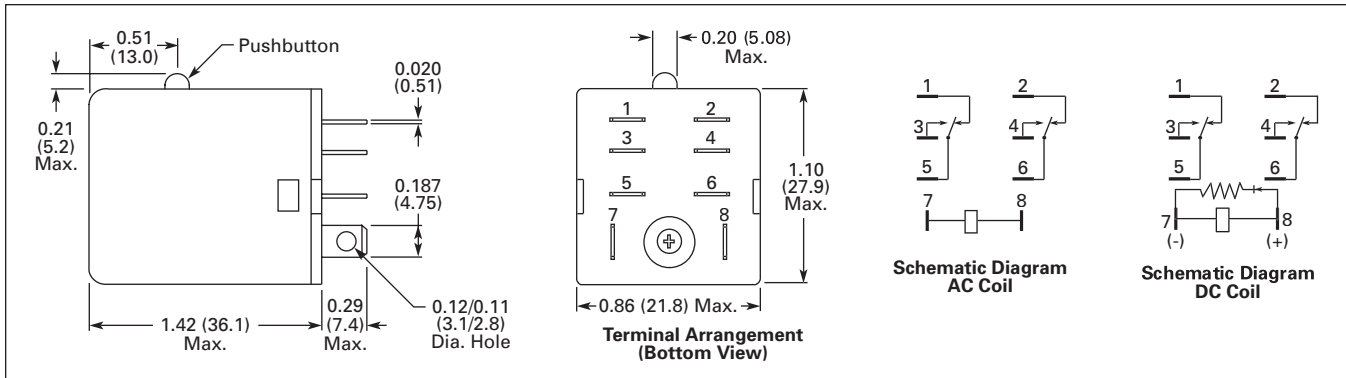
D7PR23 — Approximate Dimensions in Inches (mm)
